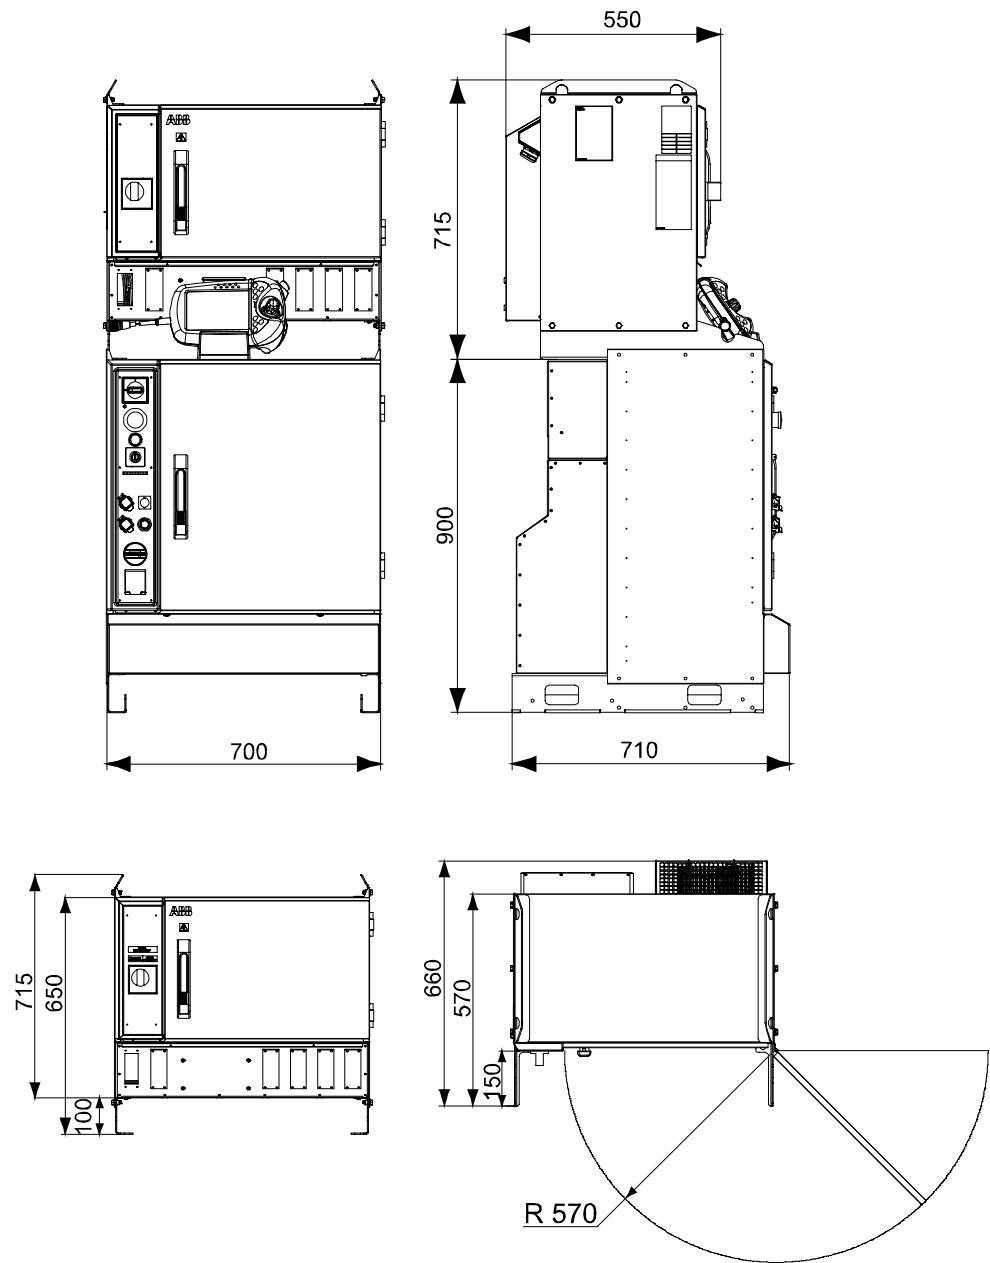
Different views of the Spot Welding cabinet (dimensions in mm).
